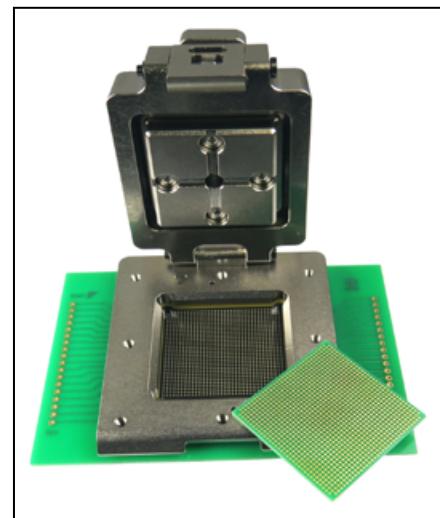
Spring loaded clamshell lid socket with silver particle filled elastomer buttons mounted on a printed circuit board with an emulated device shown next to it.
